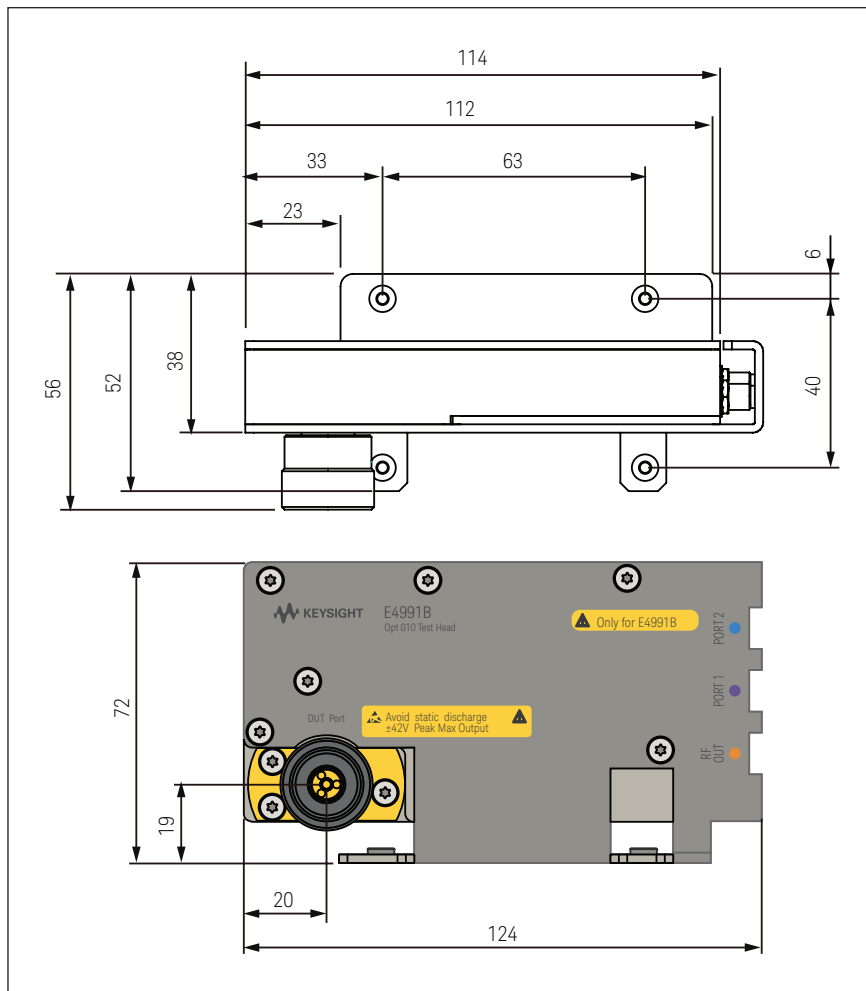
Option E4991B-010 test head dimensions (in millimeters)
